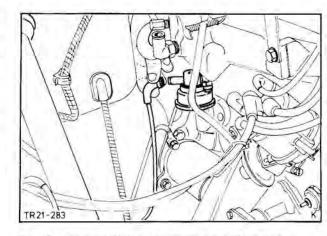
Remove fuel line from petrol pump ('A' engine)
